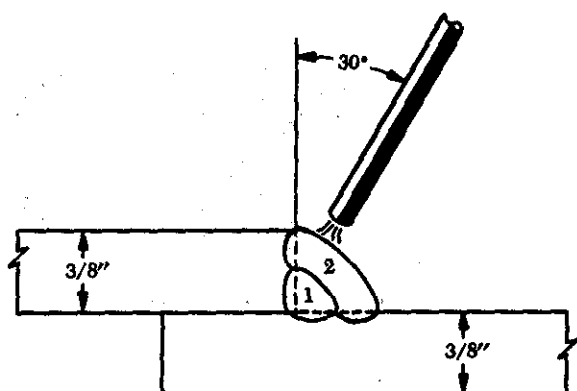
Typical lap joint fillet weld.
